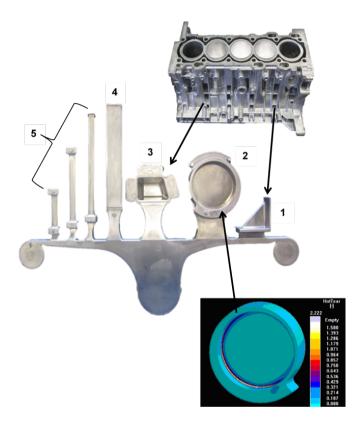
High pressure die casting test geometry shows critical sections which appear in real life engine blocks. The disc shaped casting indicates
